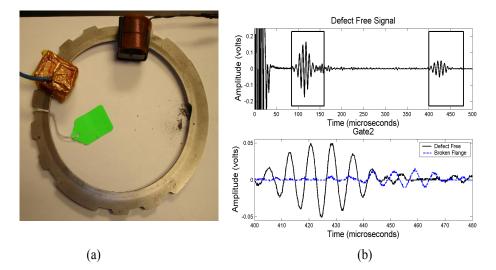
(a) Damaged flange and (b) ultrasonic waveform comparing the defect free flange to the damaged flange.
